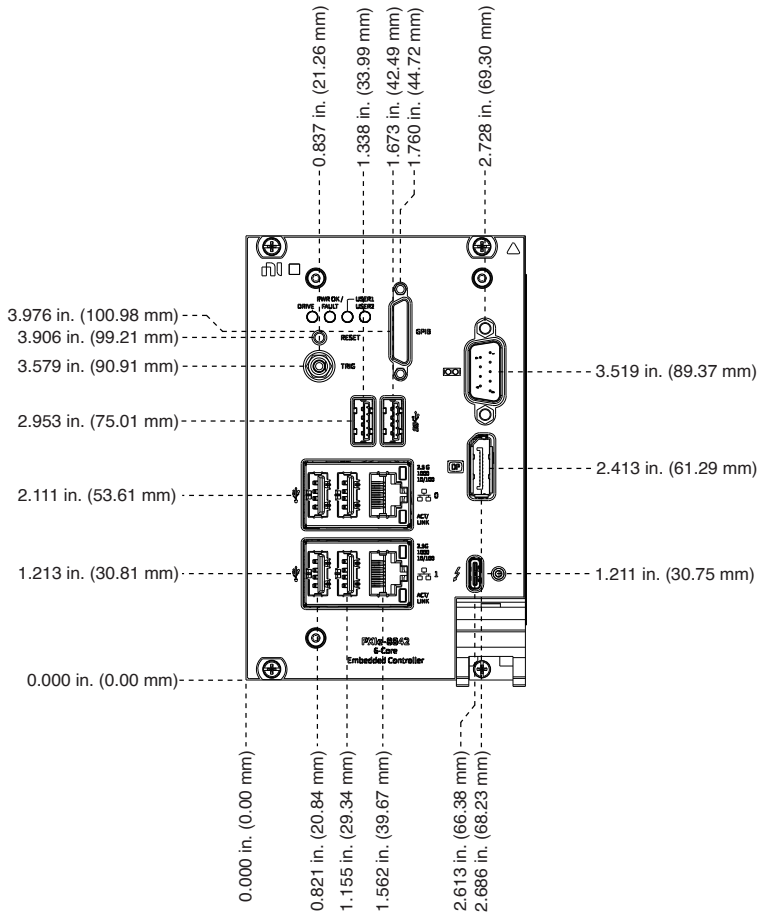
PXle-8862 Front Panel Layout and Dimensions
